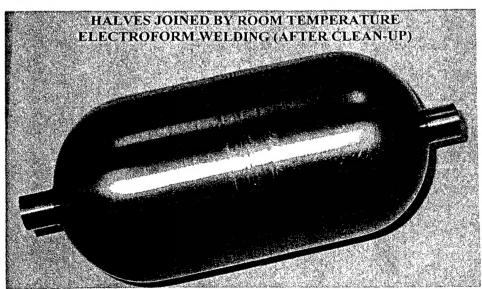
Processing Sequence for Electrformed "Cold Weld" Joining of Tank Components
